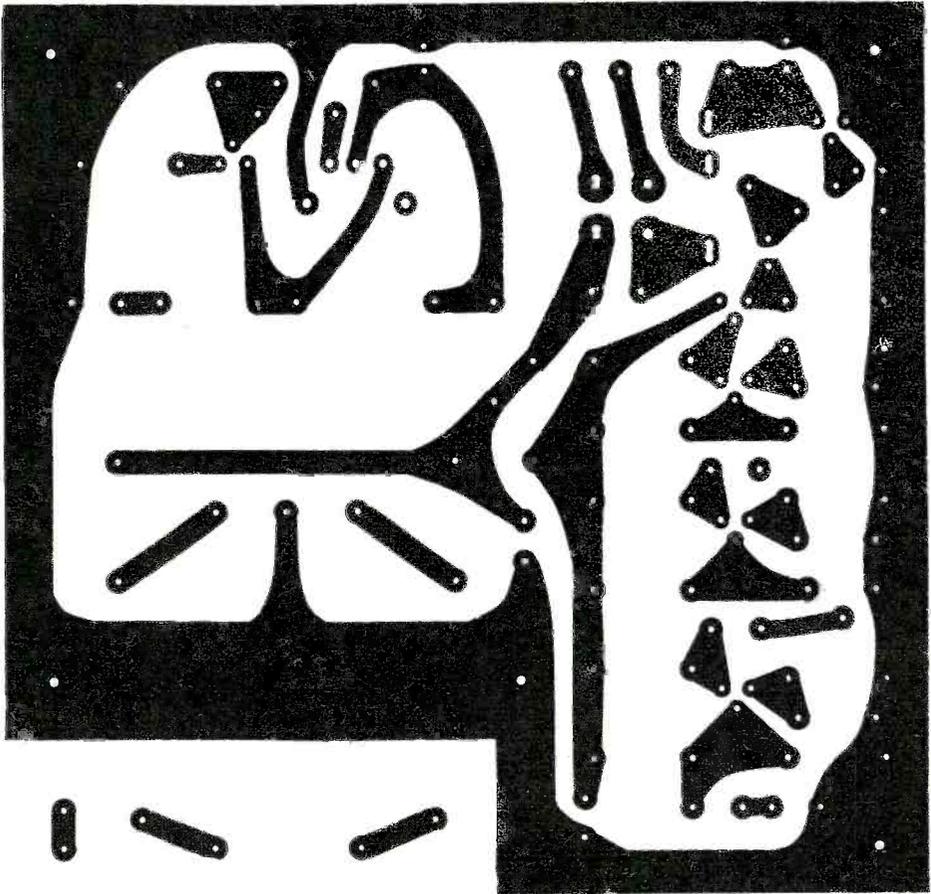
Actual size photo of conductor side of printed circuit board. Components can be mounted on any type of chassis, but care should be exercised to prevent stray leakage, or coupling.
